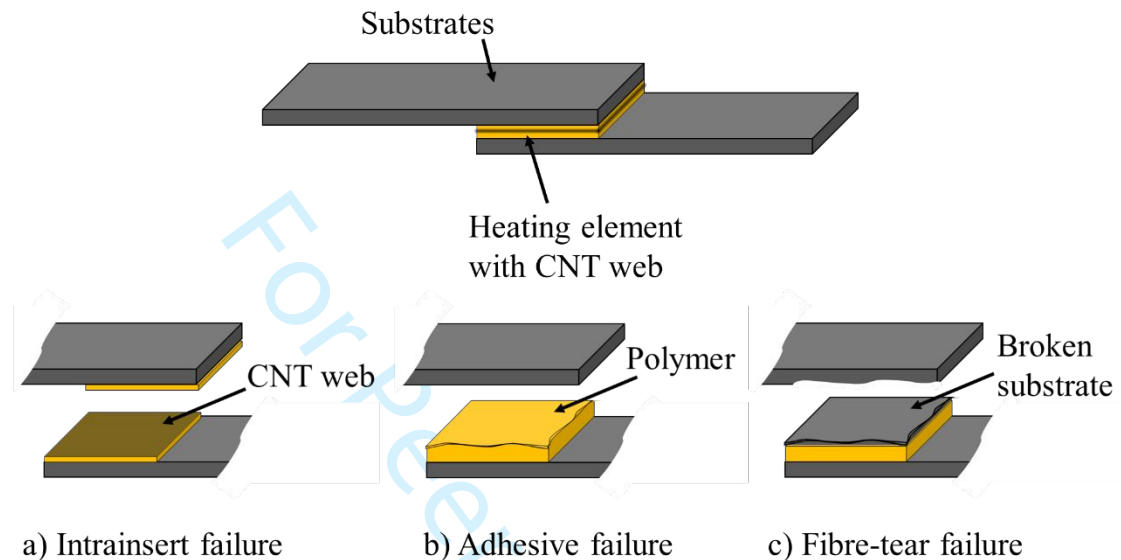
Main types of detected failures in welded samples after single lap shear test.
